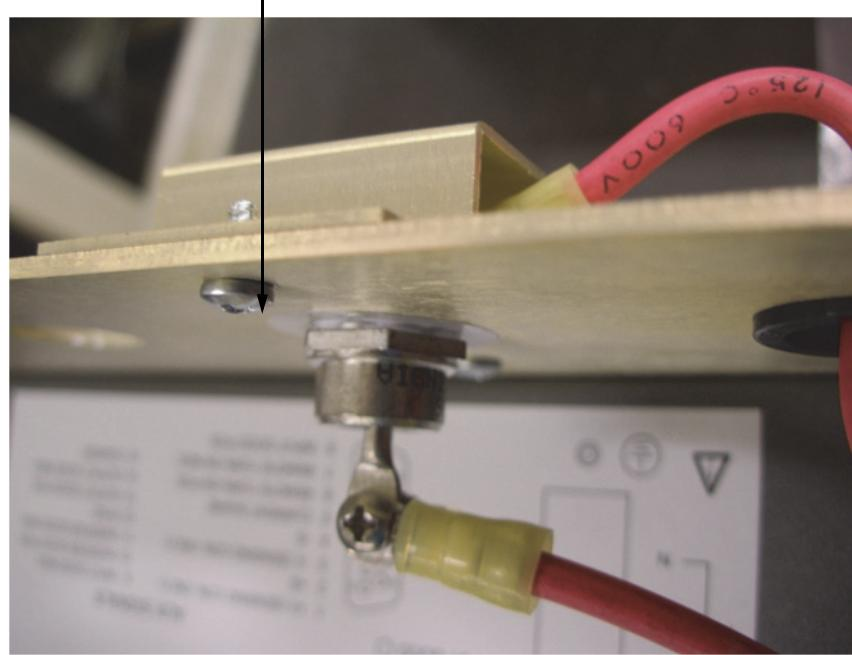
P0918ZL Cable Assembly Connections to P0904HW Wiring Panel - Part 2
